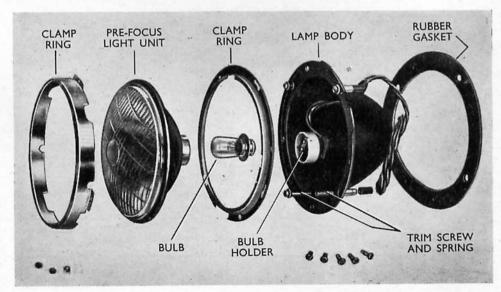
Exploded view of head lamp with pre-focus light unit. On Unified European head lamps, the buoand holder are integral
